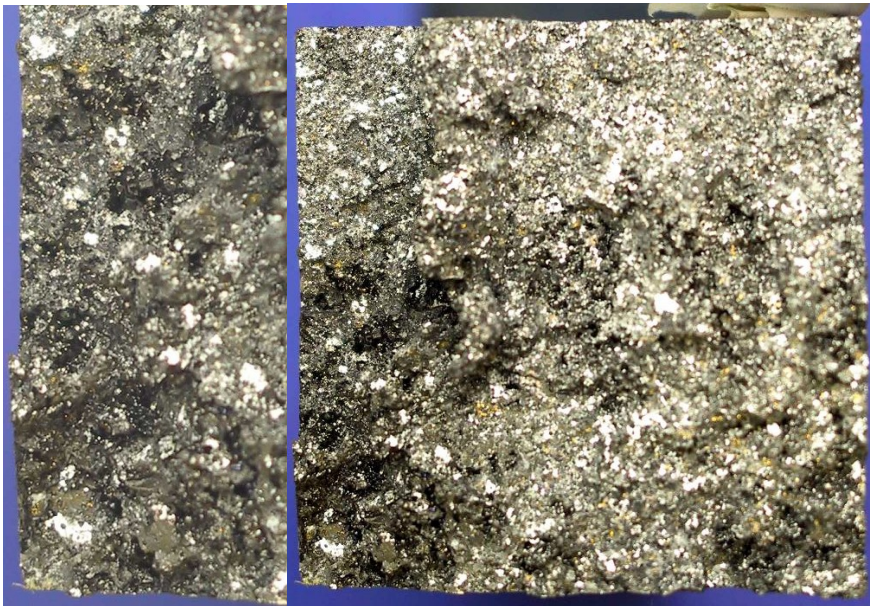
Fracture surface of the specimen with the poorest fatigue endurance (1.1). Left is a detail from the defected area in the left lower corner.
